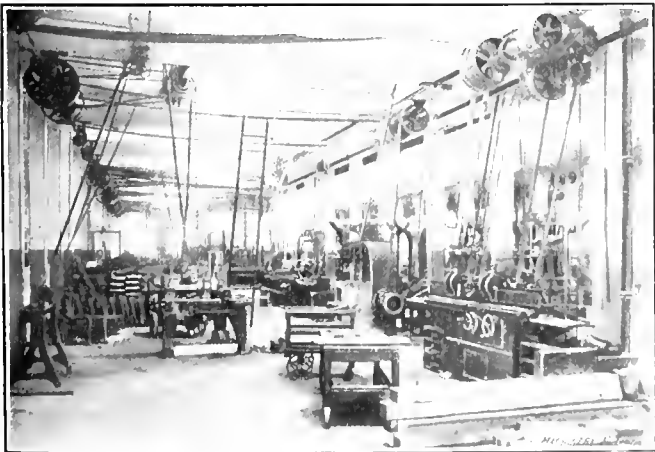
Grinding, Boring and Heavy Turning, also Tool-room in Middle Distance.
